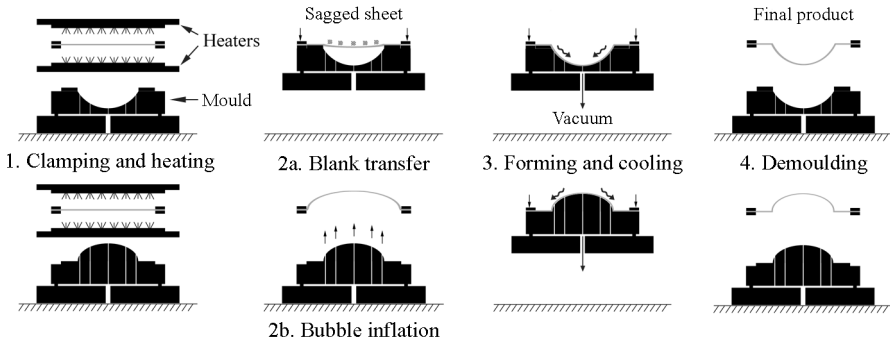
Thermoforming process steps; top: vacuum forming, bottom: drape forming
